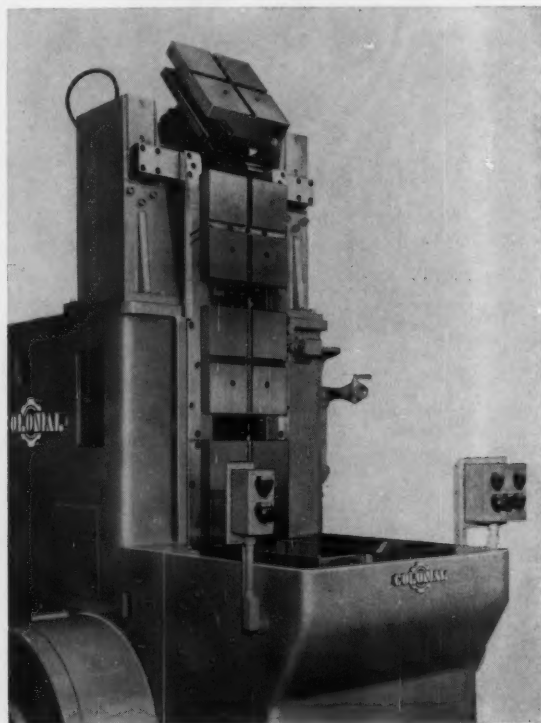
View of machine seen in Fig. 1 with guards removed to show chain-mounted rams
